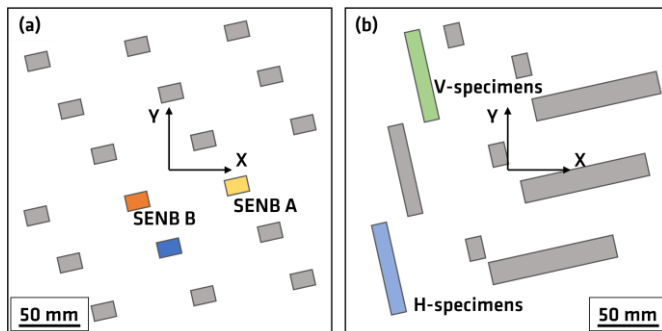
a) Build positions of the SENB A and SENB B specimens, and b) the walls for the in-situ ND tensile specimens.
